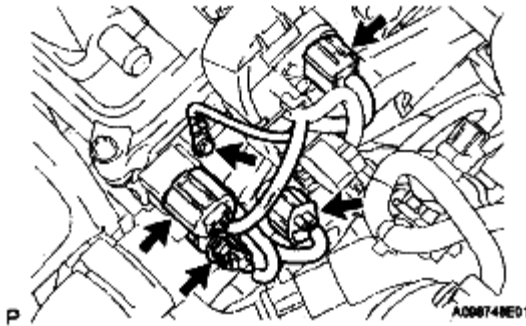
Locating Radio Setting Condenser Sensor Connector
